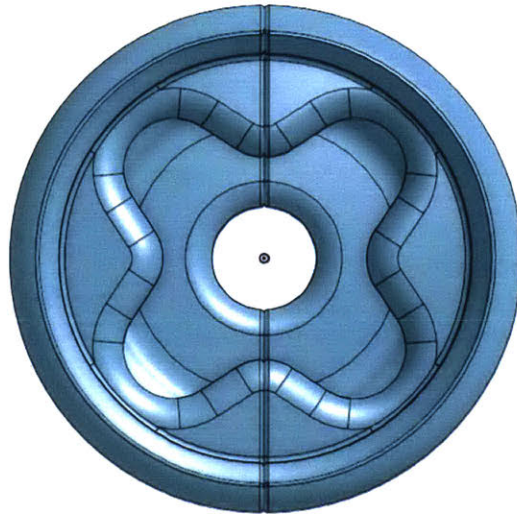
Bottom view of the Granular Jamming Gripper “cup” and the newly added torque holding feature.
